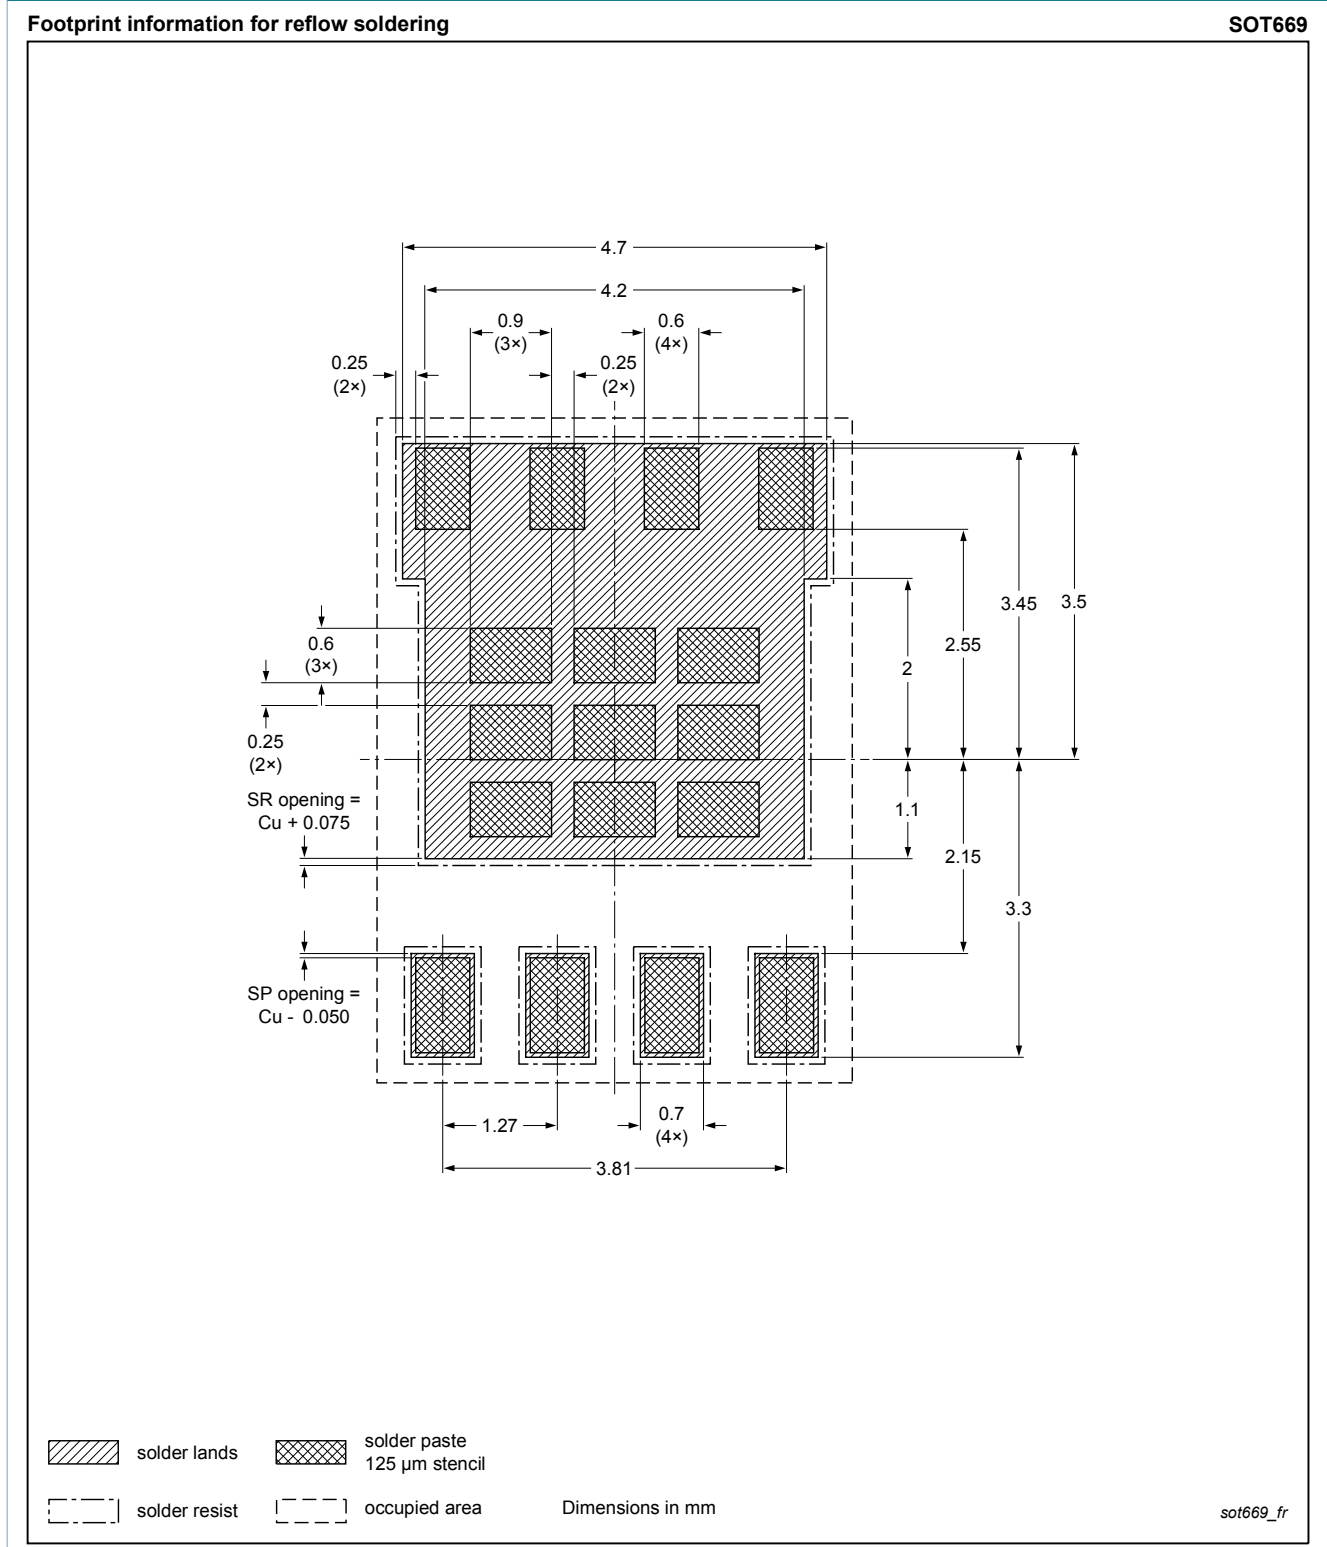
Reflow soldering footprint for LPAK56; Power-SO8 (SOT669)
